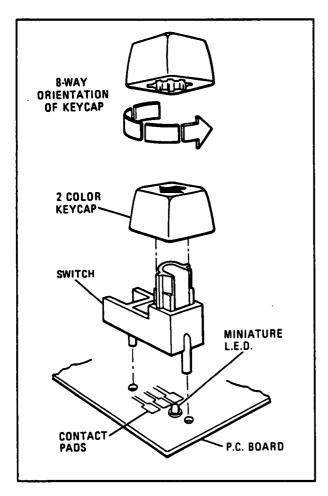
Front-Panel Pushbutton Switch Assembly
